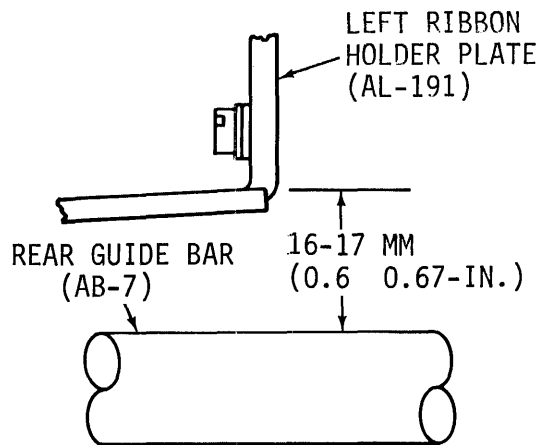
LOCATING DIMENSION FOR LEFT RIBBON HOLDER PLATE WITH RESPECT TO REAR GUIDE BAR
